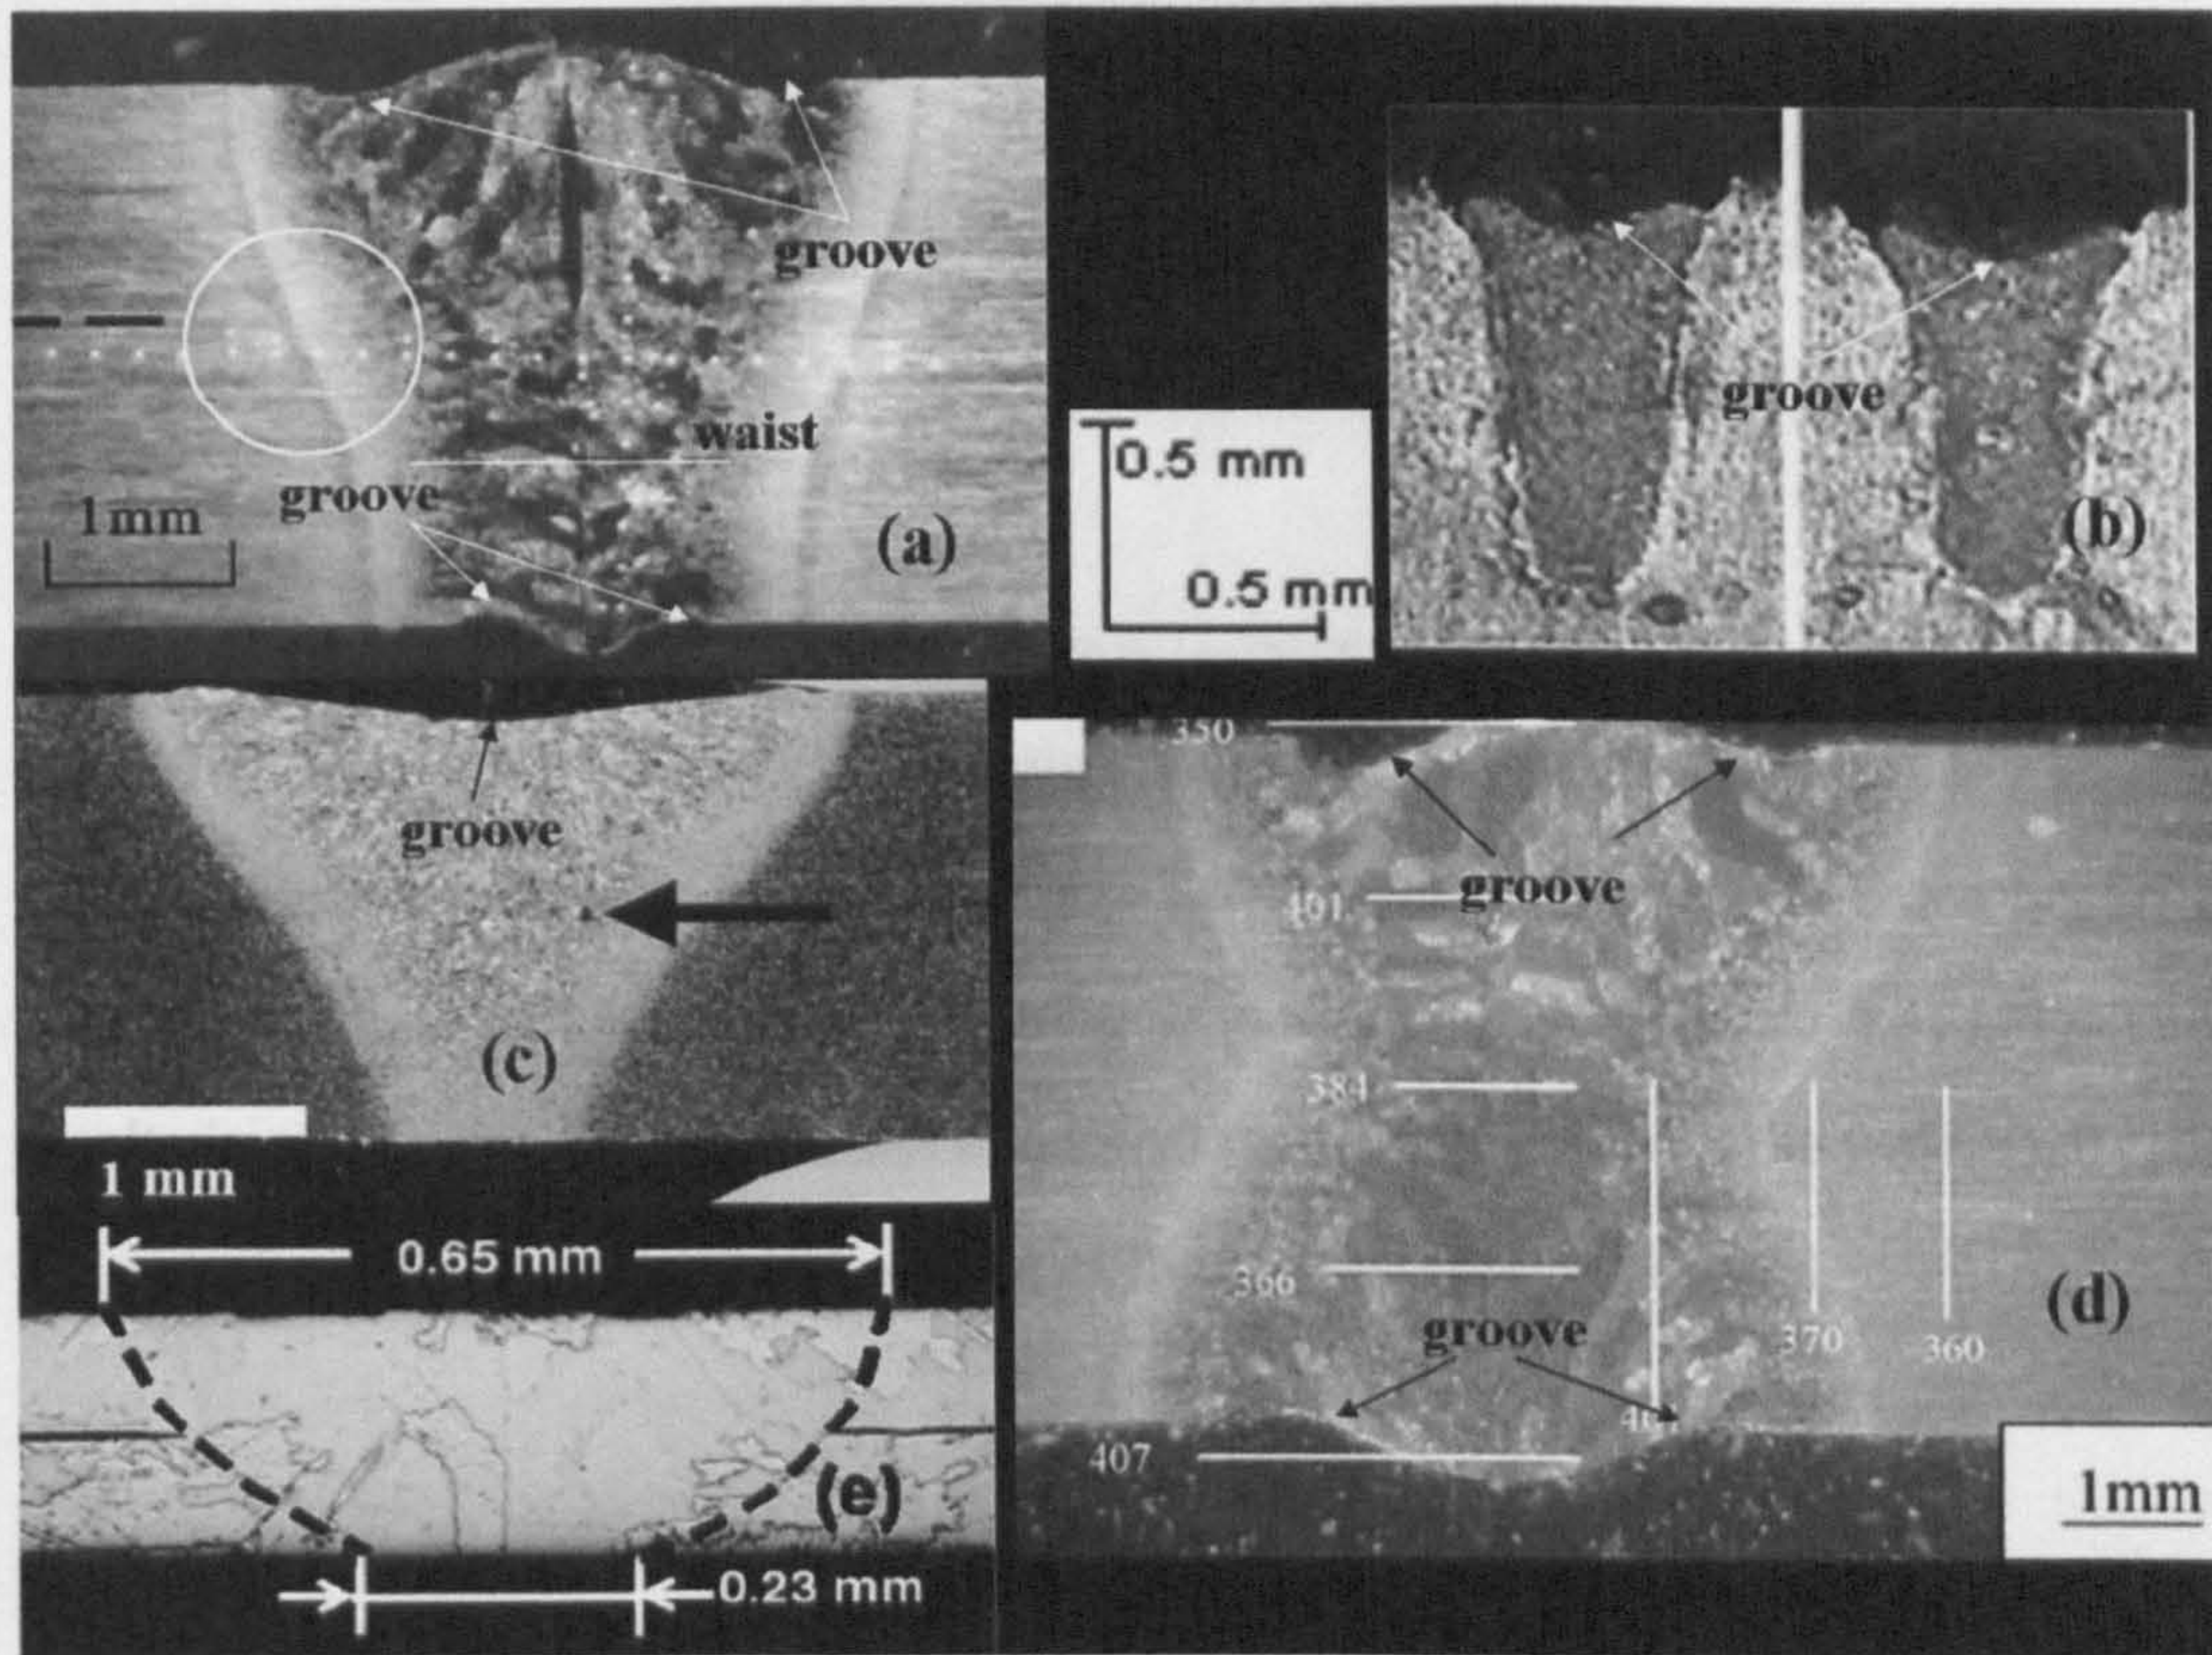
Cross-sectional shape in different types of laser welding process: a) Continue wave (CW) CO₂ laser weld in Ti6Al4V, power 2500 W, speed 1500 mmmin⁻¹ [3]; b) Pulsed Nd:YAG weld in commercial pure titanium, power 1600 W [11], pulse duration 2ms; c) Diode laser weld in low carbon steel, power 2260 W, welding time 0.18s [6]; d) CW CO₂ laser weld in Ti6Al4V, power 2000 W, speed 1200 mmmin⁻¹ [5]; e) CW fibre laser weld in pure titanium, power 47 W, speed 600 mmmin⁻¹ [10]
